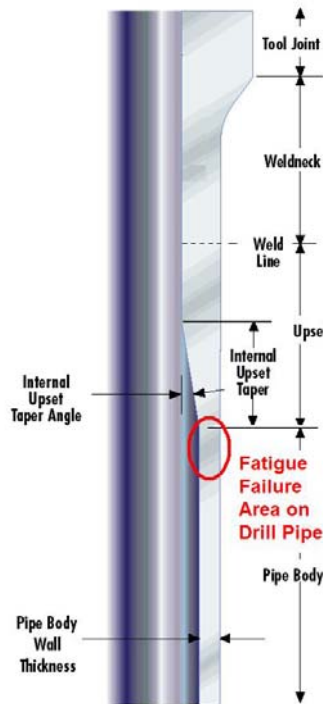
Drill Pipe Upset Geometry Fatigue Location
